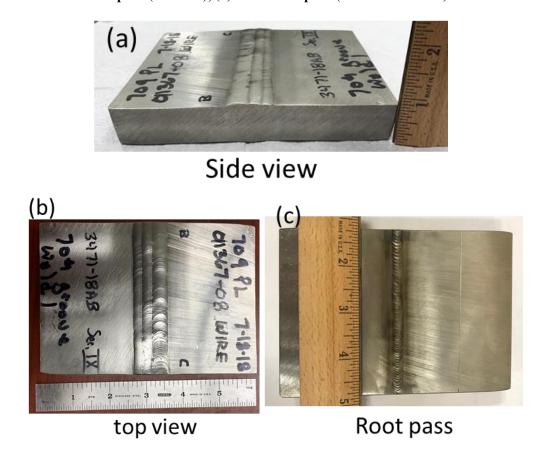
W1 weld: code qualification weld on Alloy 709 AOD SA1100 plate. P level in weld wire: <20wppm, P level in base metal plate: 140wppm.
